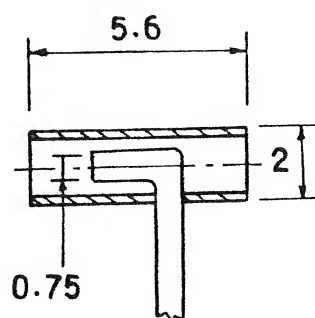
SCHEMATIC VIEW OF SHIELDED PITOT TUBE
